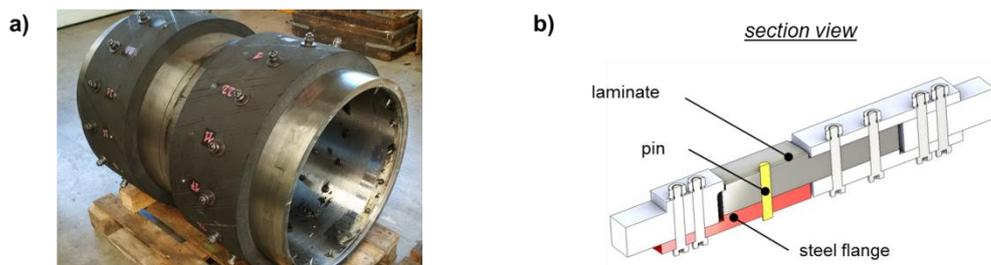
a) Picture of the test specimen shaft before cutting into single specimens and b) single specimen: schematic cross-sectional view of the developed pin test set-up of the *FlexShaft* load introduction. The steel parts at both ends (colored in white) are used for attachment to the existing test rig.
